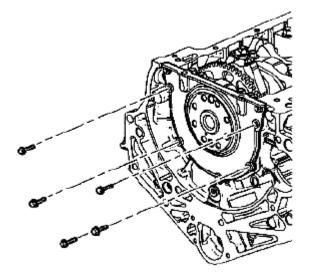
Identifying Engine Flywheel Courtesy of SUZUKI OF AMERICA CORP.
